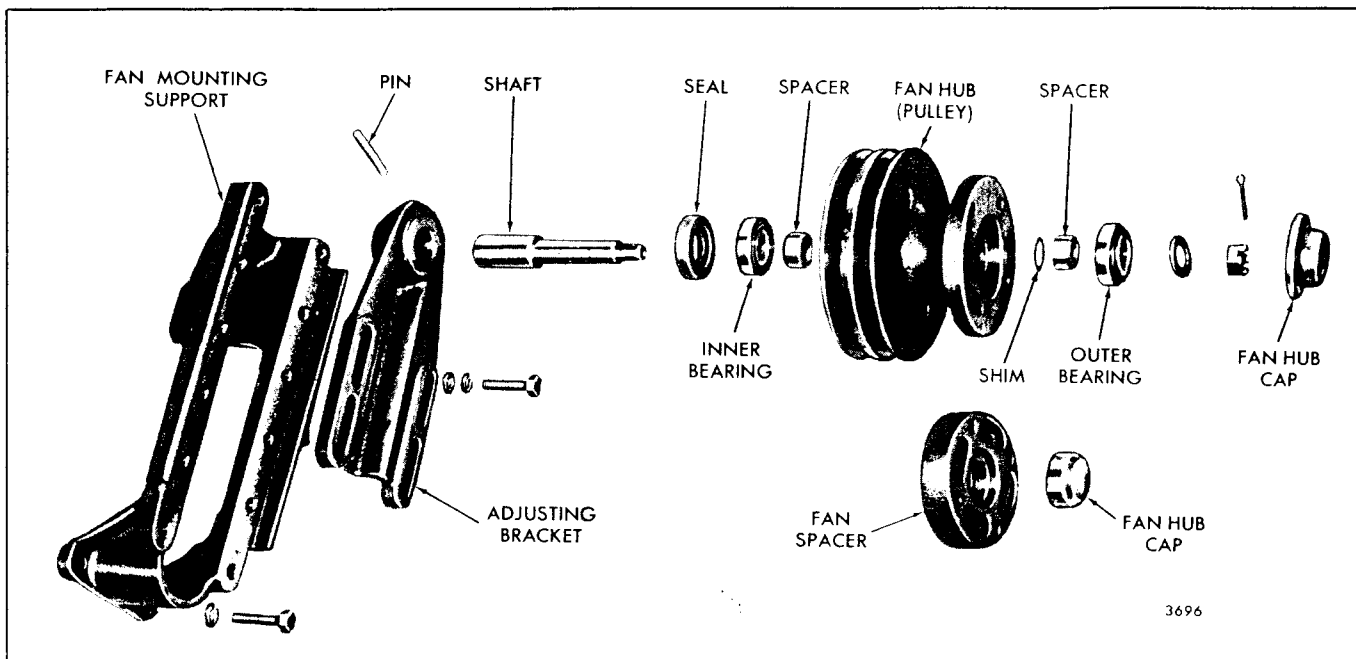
Typical Fan Hub, Shaft and Adjusting Bracket Details and Relative Location of Parts (6V Engine)
